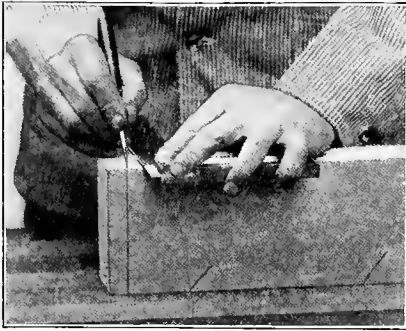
Putting Knife and Square in Position for Drawing Line on Edge
